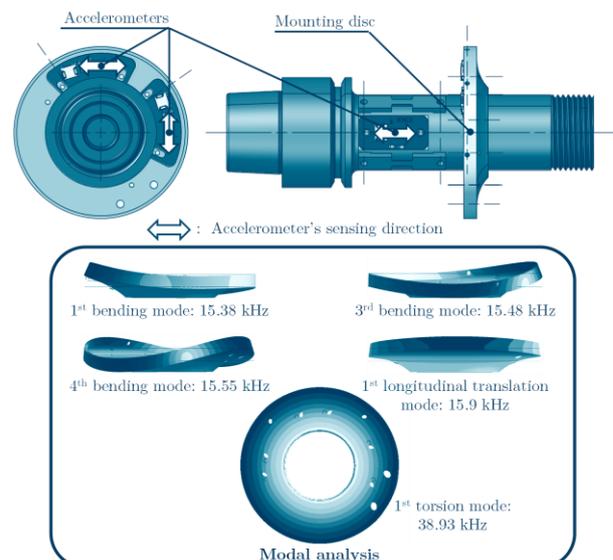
Mounting of accelerometers (top), mode shapes of the mounting disc
